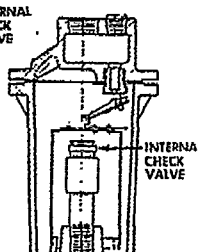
Internal check valve installed in top of trap inlet tube.
